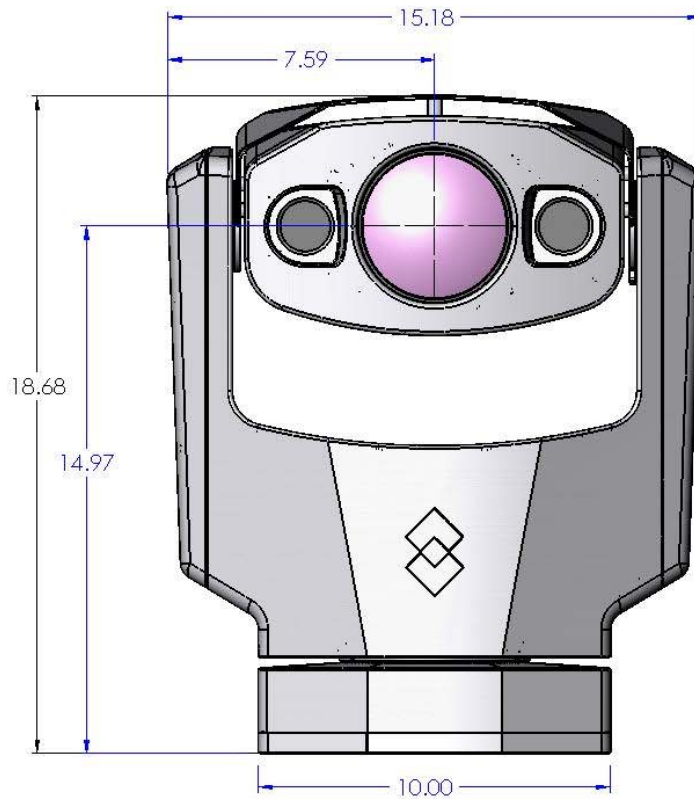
PTZ-35x140MS Dimension Drawing (inches)
